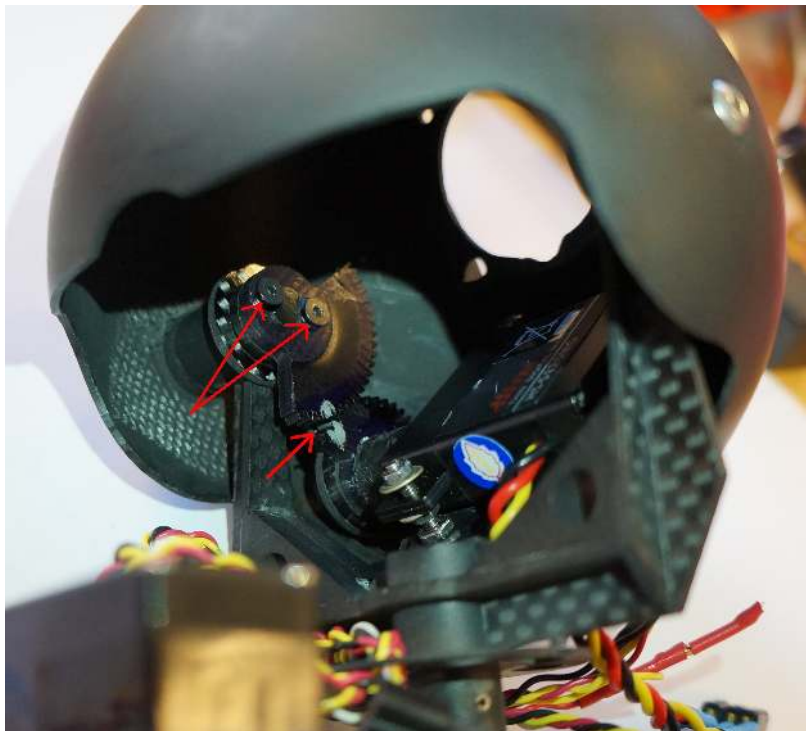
Gimbal without camera. Notice the two hex bolts holding the gear and yoke inside, as well as the white mark indicating the alignment of the gears.
